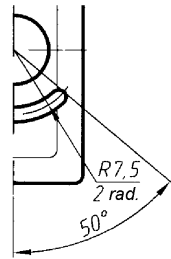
Crimping Tool Drawing Part for Stamping Segment Craters
